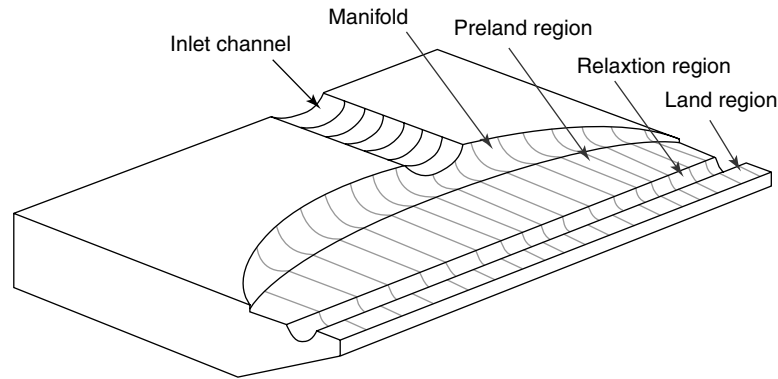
Main sections of the flow channel of a flat film or sheet die.
